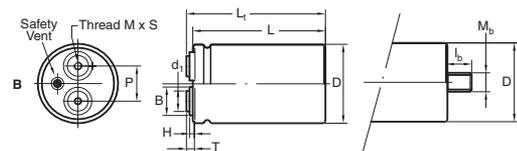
B: High current M6 disc: Screw terminal (ST) and screw terminal bolt nut (STB)
